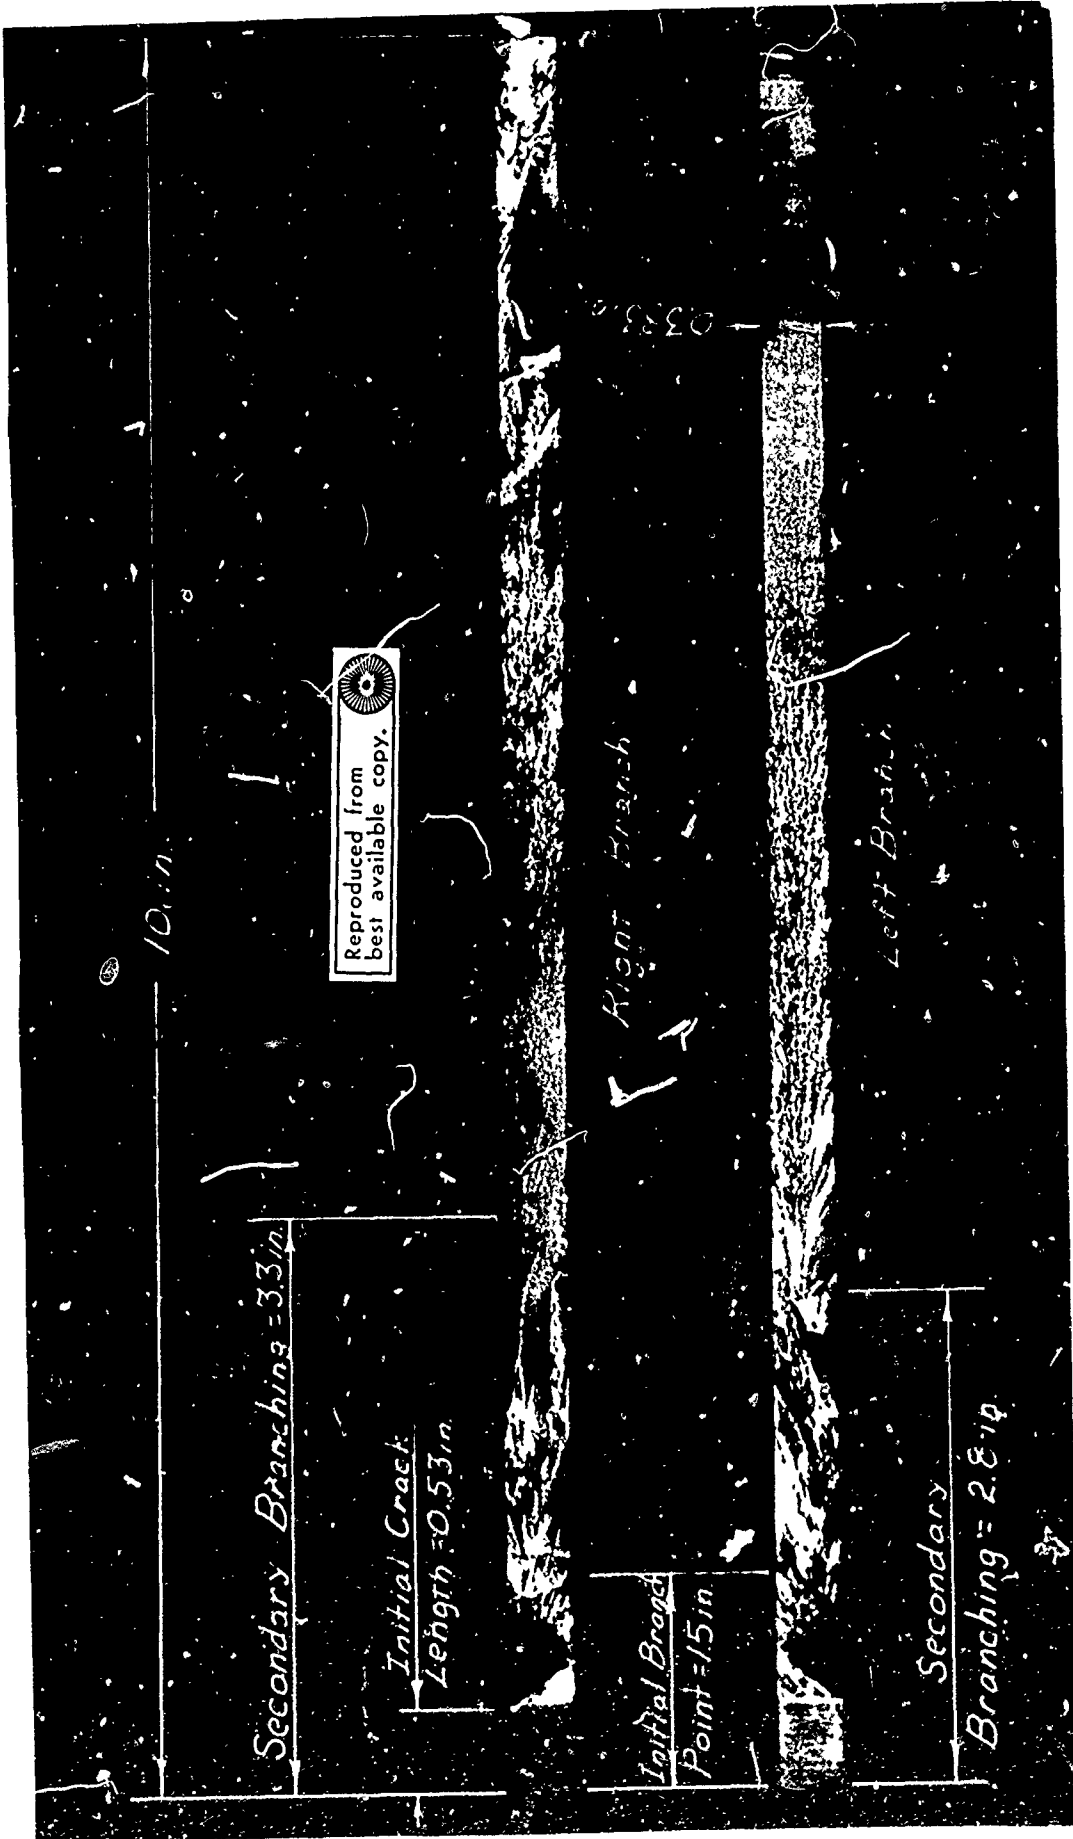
FRACTURE SURFACE OF LEFT AND RIGHT BRANCH CRACKS OF TEST NO. 5.
